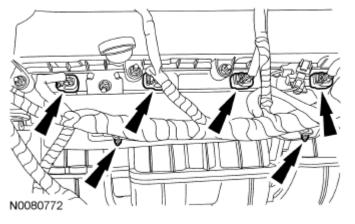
Locating Fuel Injector Electrical Connectors Courtesy of FORD MOTOR CO.
